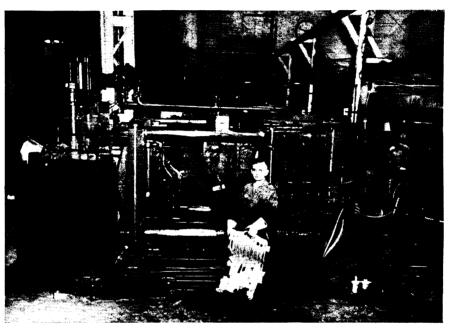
One of the larger types of submerged-plunger machines tooled for the production of zine automotive grilles. The holding furnace is at the front of the machine.
